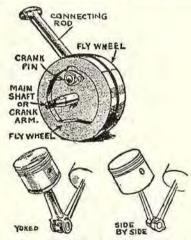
Upper illustration shows a connecting rod, a crank pin, and a crank arm on a single-cylinder motorcycle or cyclear engine. Note that a crank pin is between the two fly wheels which are placed in the crank case. The lower illustrations explain two methods of connecting two connecting rods to one crank pin on a "V"-type engine.
